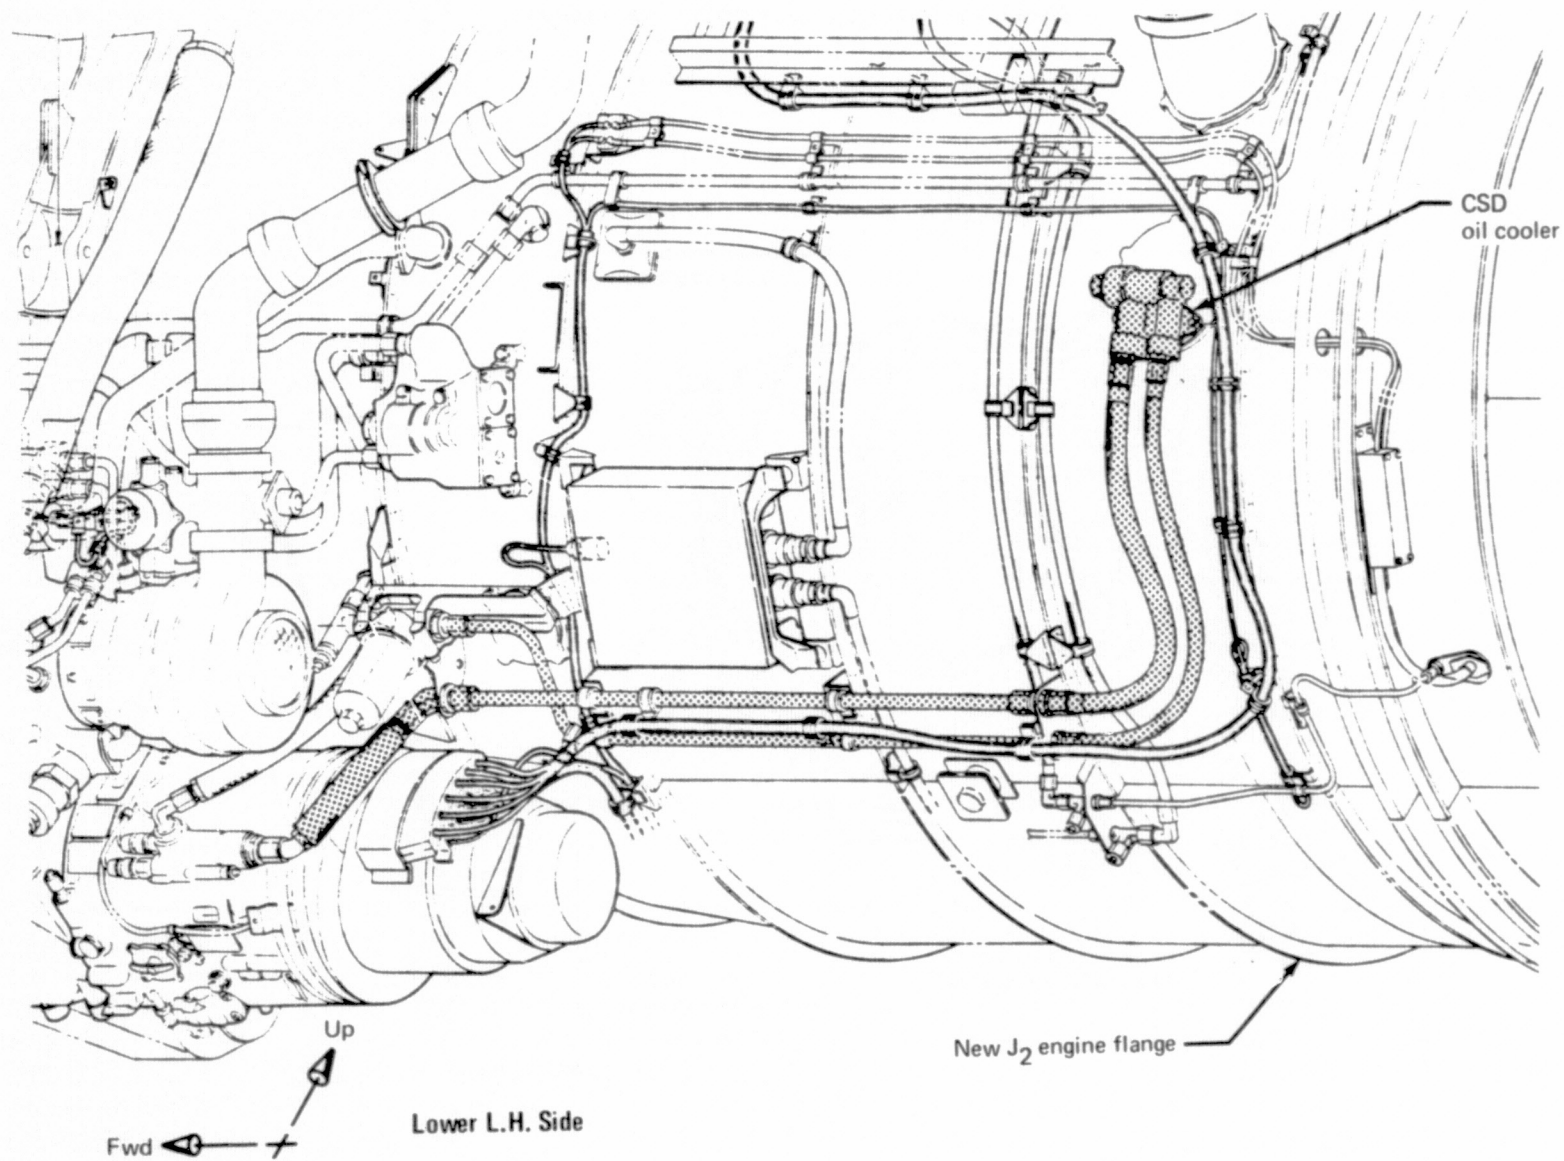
JT8D Refan Powerpack Assembly—Constant Speed Drive (CSD)
